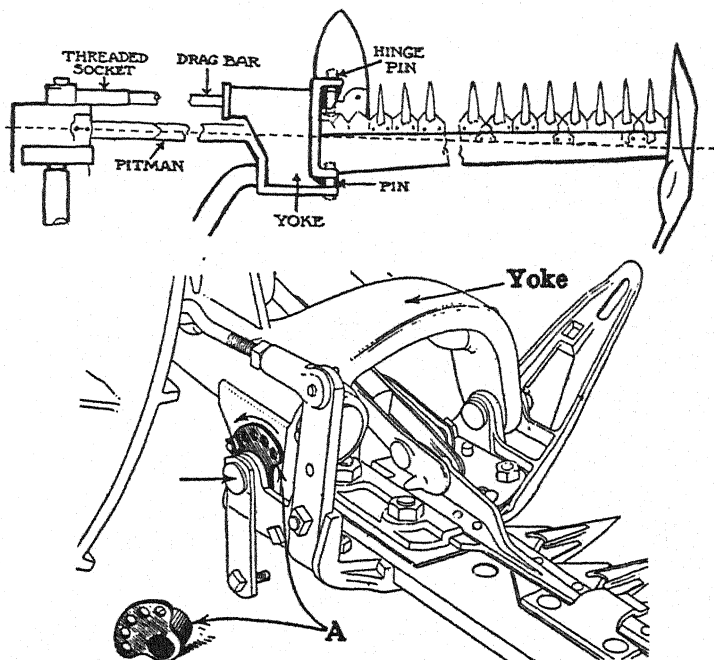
Upper*—Aligning the cutter bar. *Lower*—Eccentric bushing (A) used for aligning.
